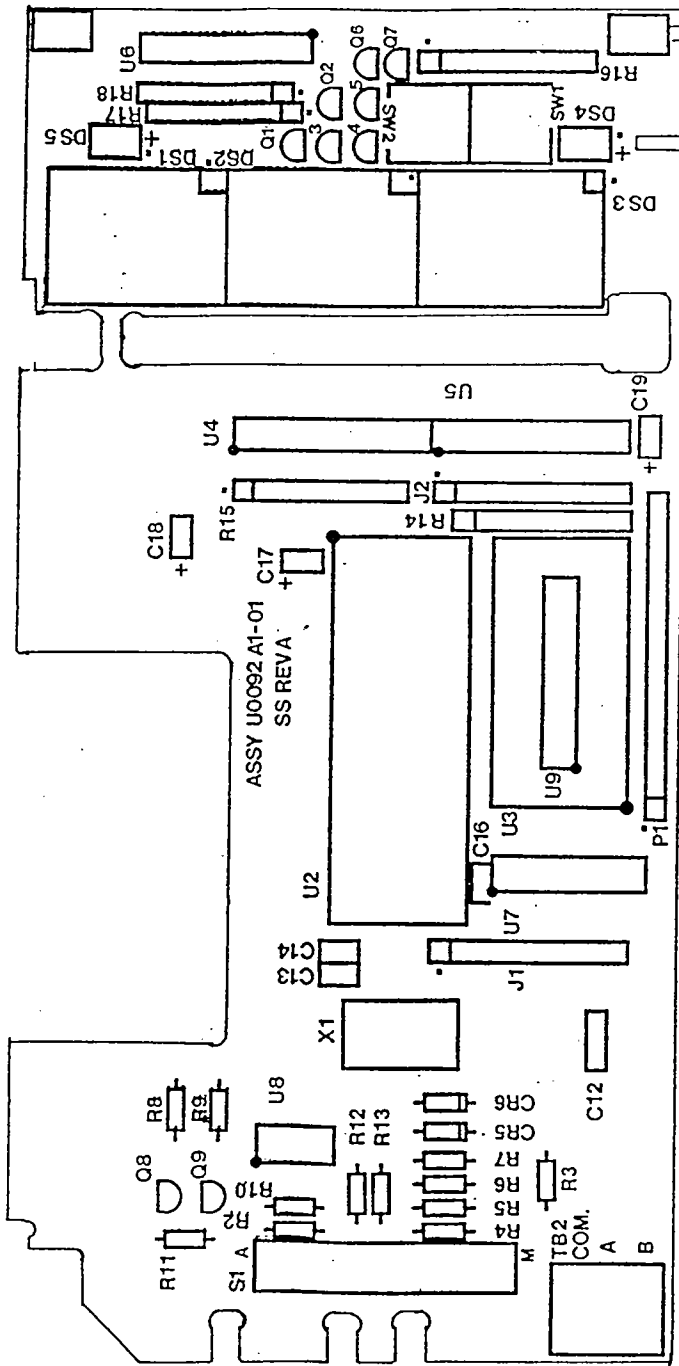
Main Board & Display Board Assembly Diagrams.
